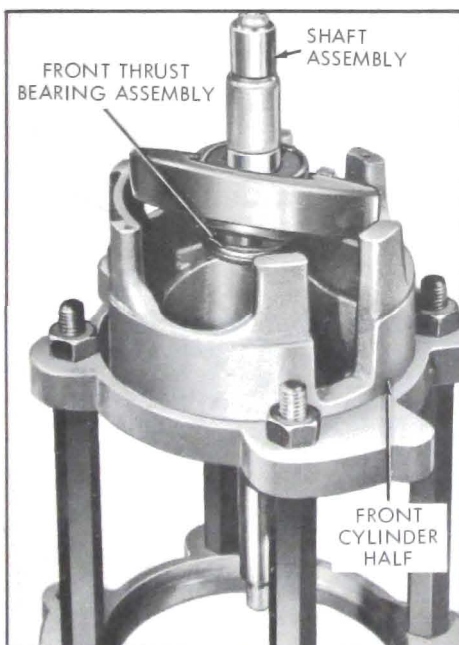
Shaft and Bearing Assembly in Front Cylinder Half
